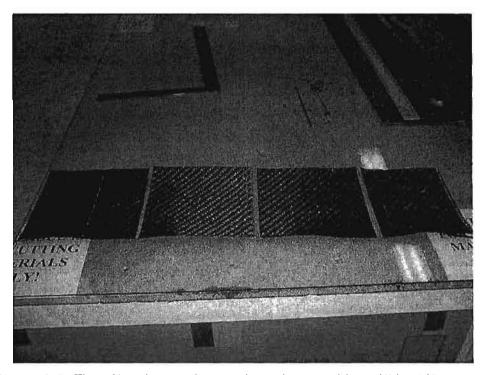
The 10" strips are then cut into pieces making 10" by 10" squares.
